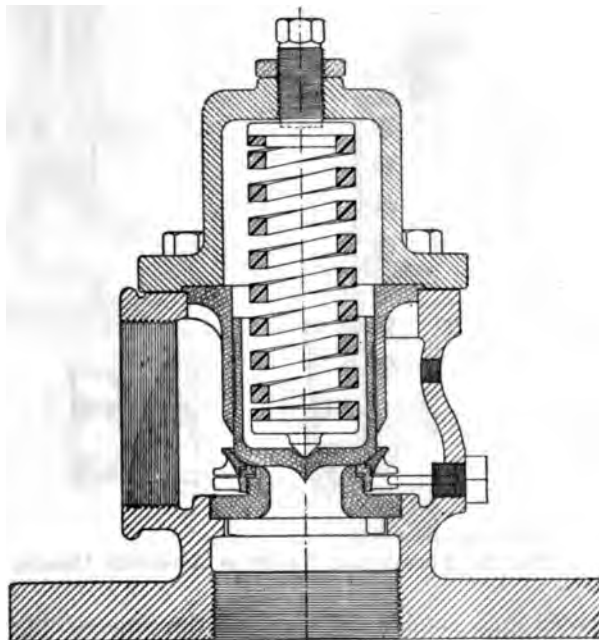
STEAM SAFETY VALVE OF APPROVED DESIGN
